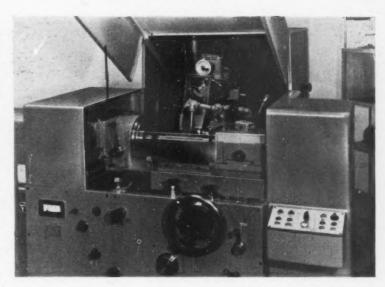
The Type GSA 250 x 250 Thread Grinder Developed by VEB Feinstmaschinenbau Dresden
